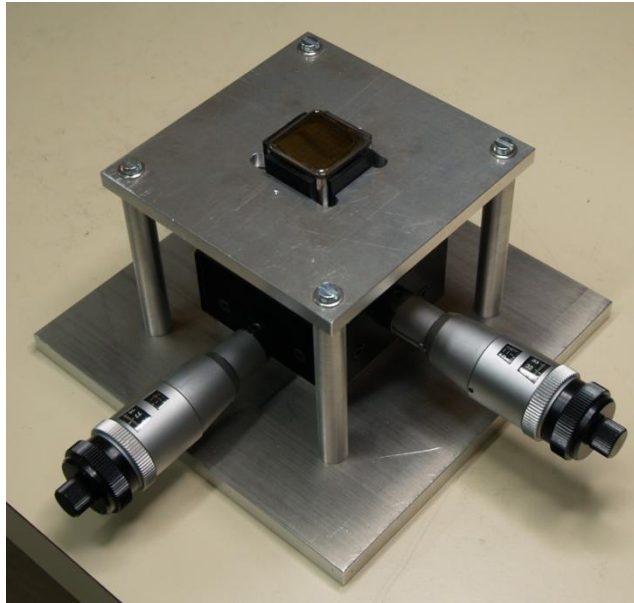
Final assembled shim tool with MAPMT and shims installed.
